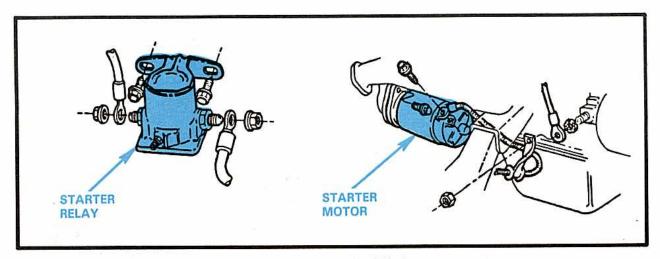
Starter Wiring — 3.8L and 5.0L Engines
